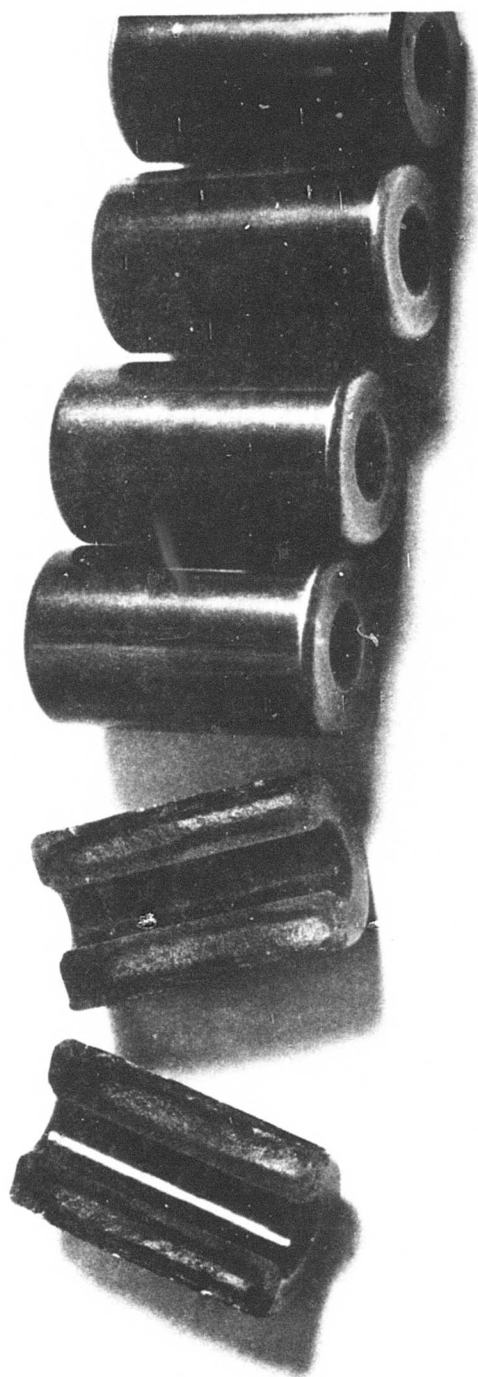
Roller Fatigue Fracture, Static Cyclic Test.
